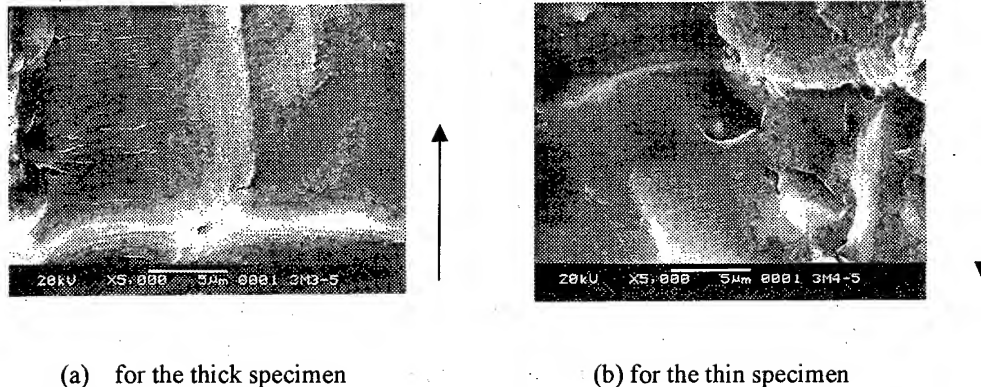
(a,b) Fractographs of fracture surfaces of thick and thin specimens under periodic single OL-UL with BL $R=-1$ (Arrows present the direction of crack propagation)
